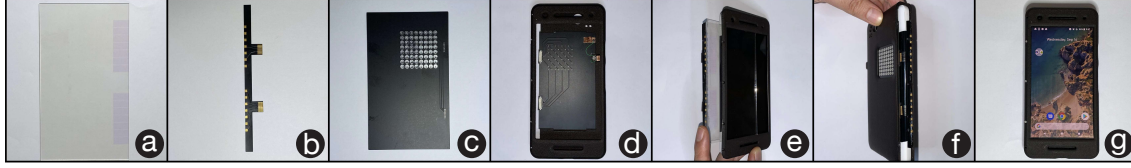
BackTrack assembly. (a) ITO electrodes are coated on the side of a thin glass. The ITO pattern will become fully invisible when attached to the phone's screen. (b) A flex PCB is used for connecting the front ITO and BoD trackpad. (c) BoD trackpad is printed on a PCB. (d) The BoD trackpad is first placed in a custom-designed phone case. We also attach to the BoD PCB a piece of copper foil, which will connect the BoD PCB with the phone's ground after the phone is inserted into the case. This copper foil is also used as a capacitive switch (Sec. 3.3) to enable/disable BackTrack. (e) The ITO-coated glass is connected to the flex PCB by conductive epoxies. We then place the phone together with the glass into the phone case. (f) Lastly, we connect the flex PCB with the BoD PCB. (g) The final fully assembled BackTrack.
